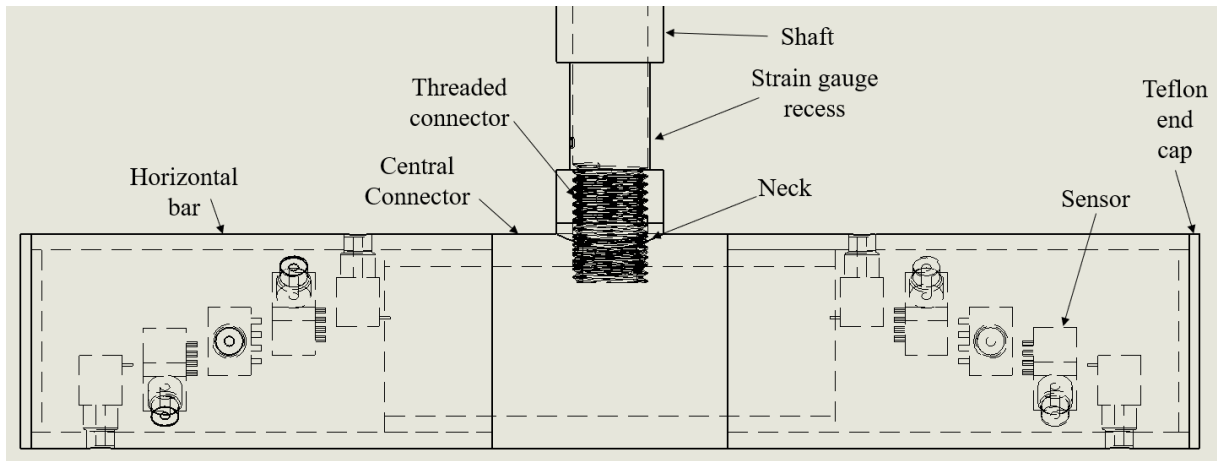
Technical drawing side view layout of T-bar (not to scale).
